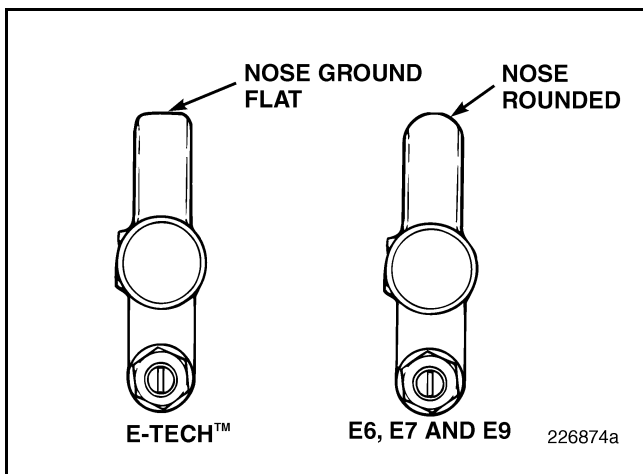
E-Tech™, E6, E7 and E9 Valve Yokes (Top View)
